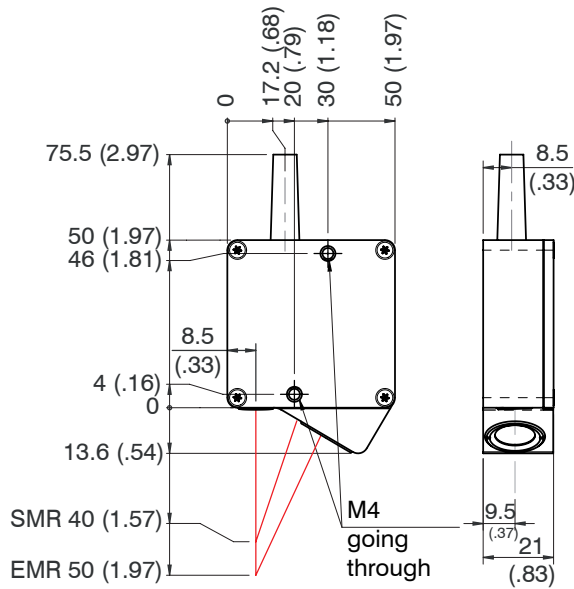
Dimensional drawing LD1610-10 / LD1630-10
